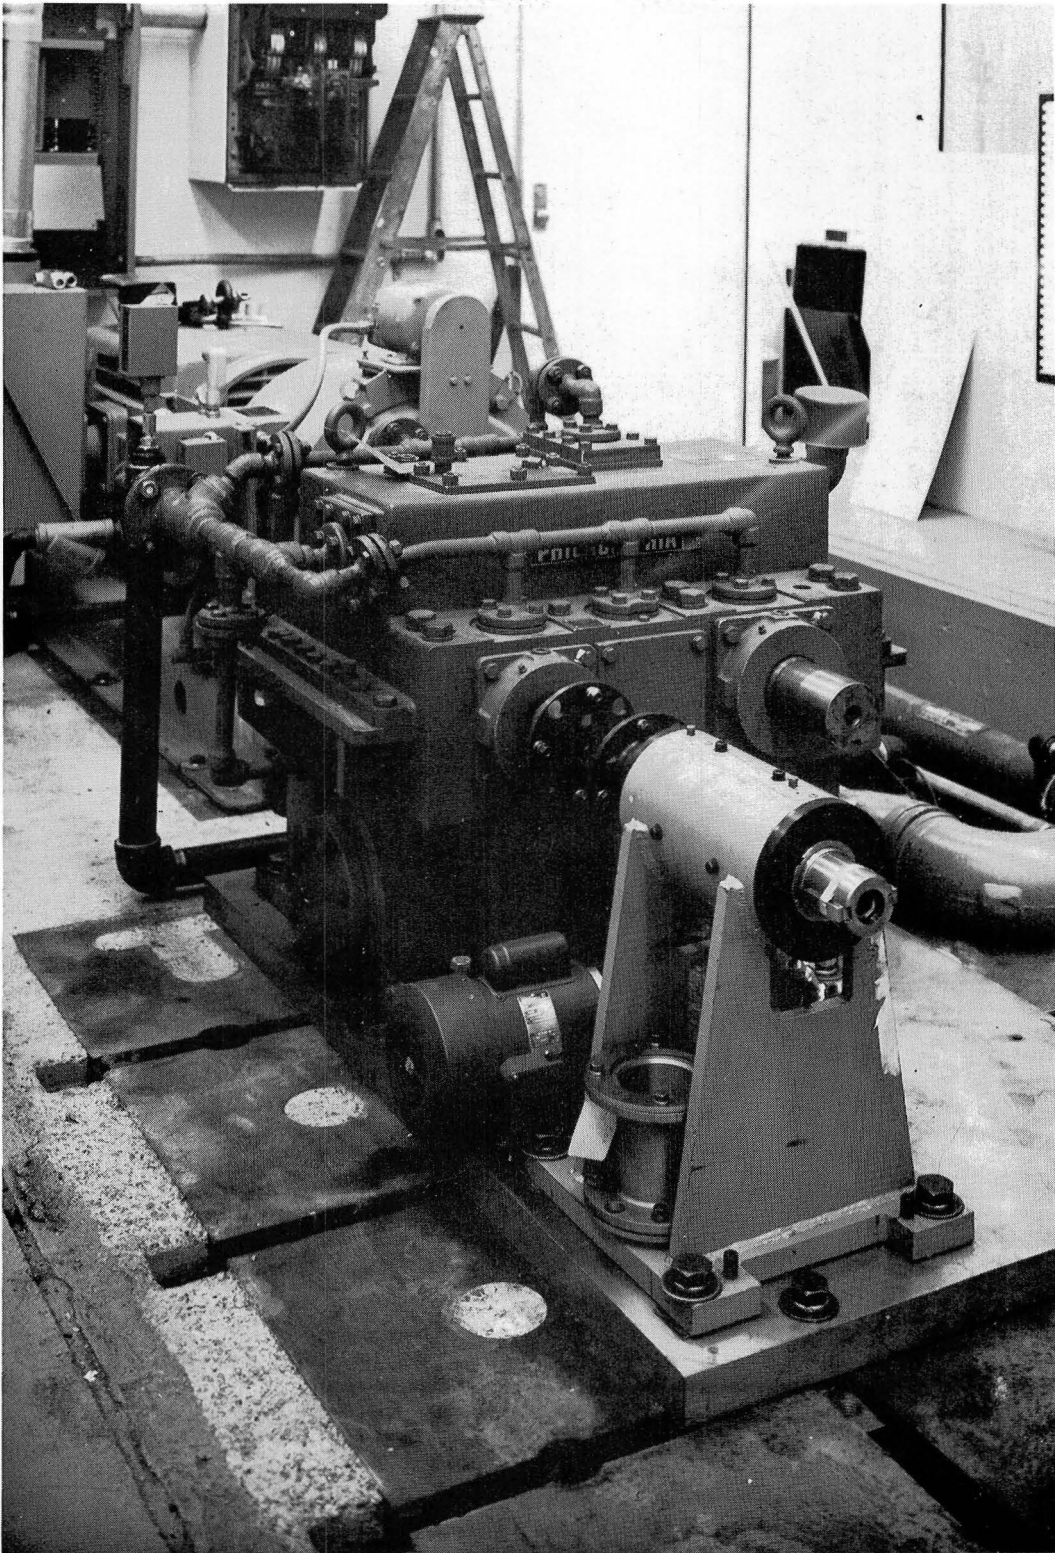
Drive Gearbox and High-Speed Spindle Mounted on Drive Gearbox Baseplate
